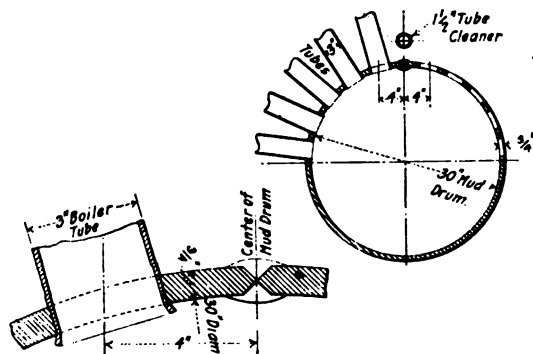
CROSS-SECTION OF MUD DRUM, SHOWING ELECTRIC WELD WHICH IS NOT IN CONTACT WITH FIRE
